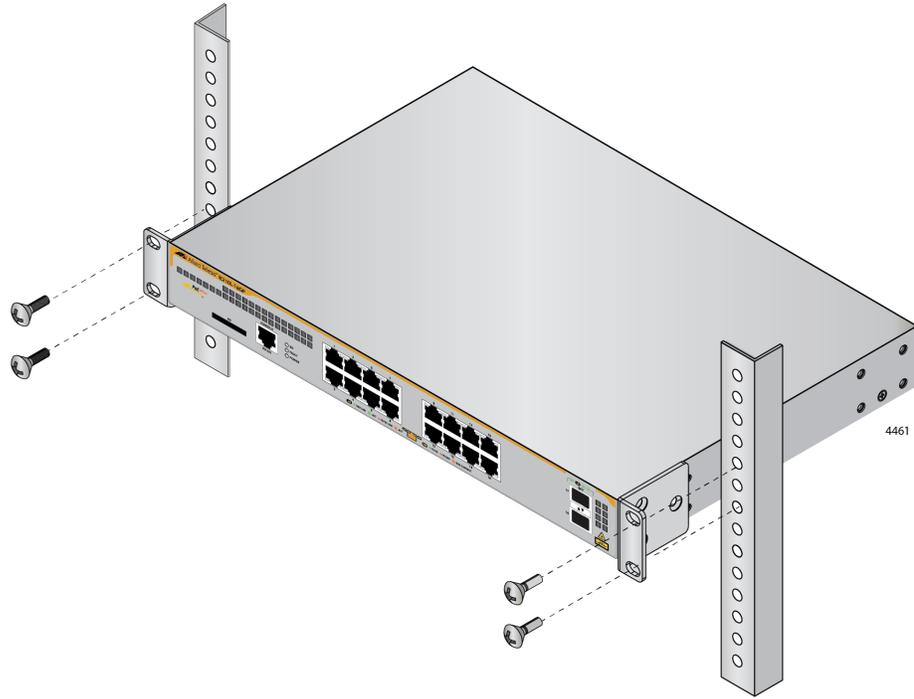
Mount AT-IE210L-18GP Switch in Equipment Rack
